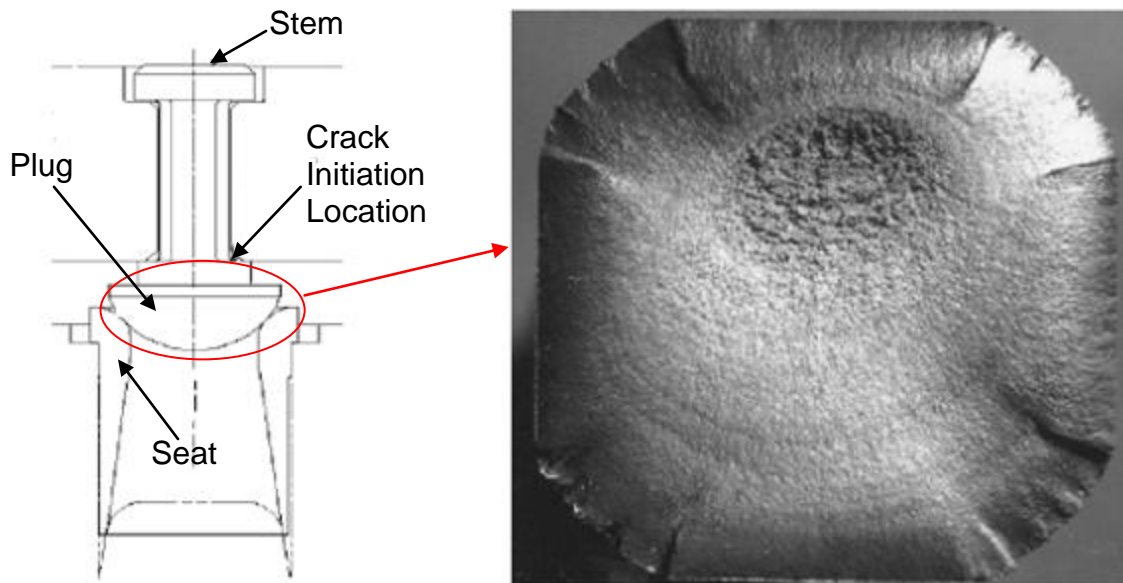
Crack initiation location in venturi valve (left) and fracture surface (right)
